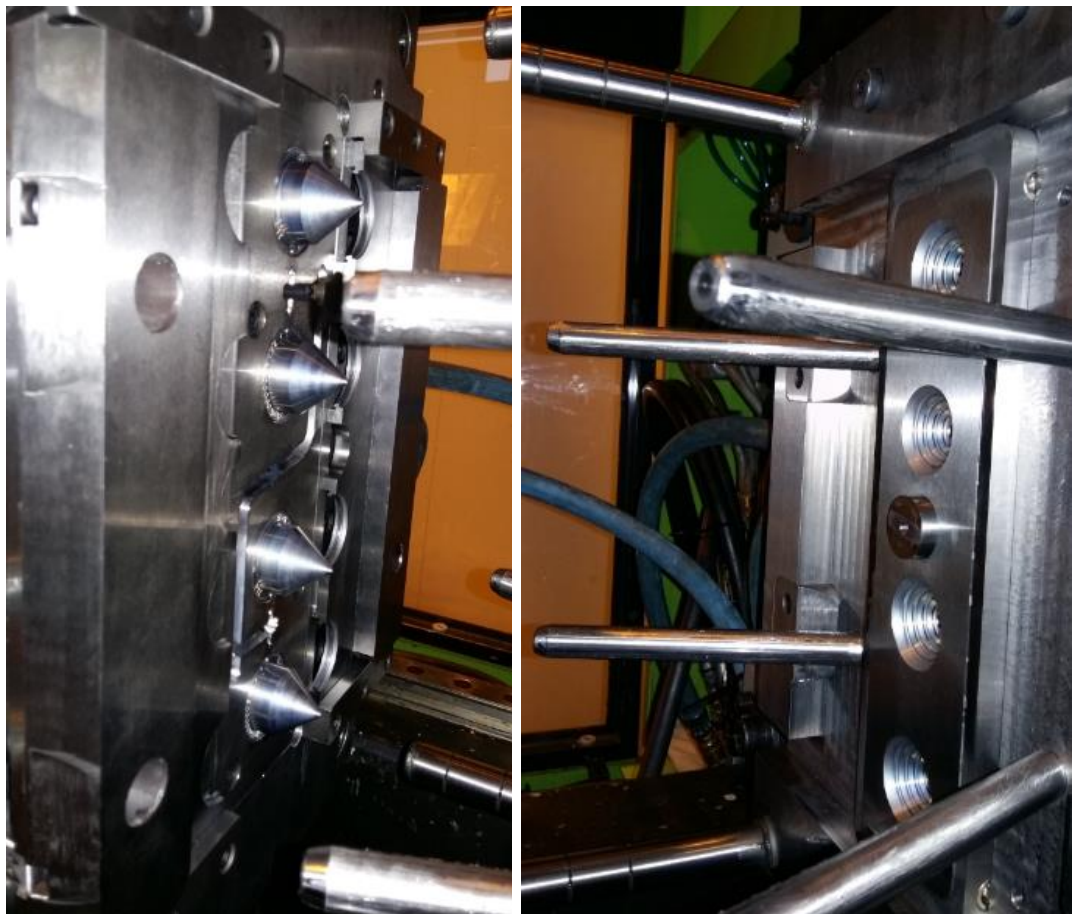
Photographs taken from the core side (on left) and the cavity side (on right) of the tool.
